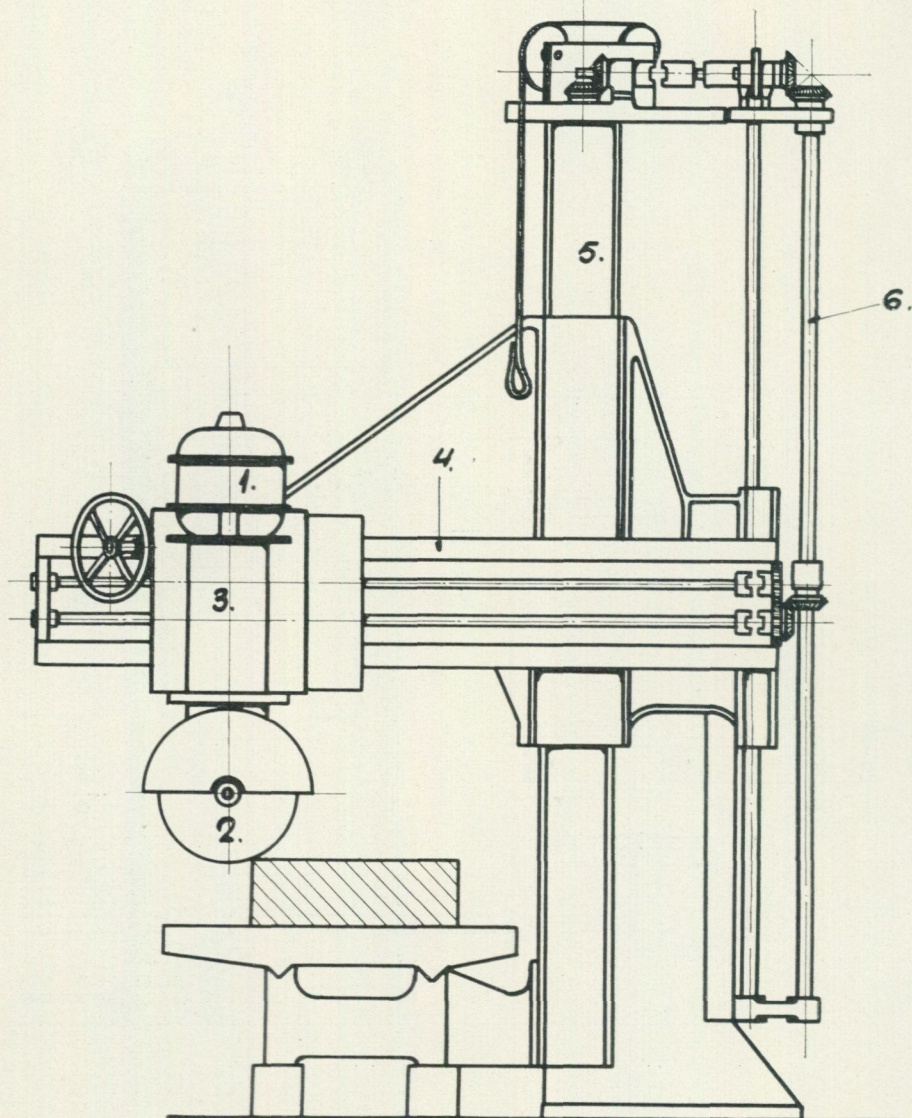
Typ II. The Patch saw and edging carborundum machine.
